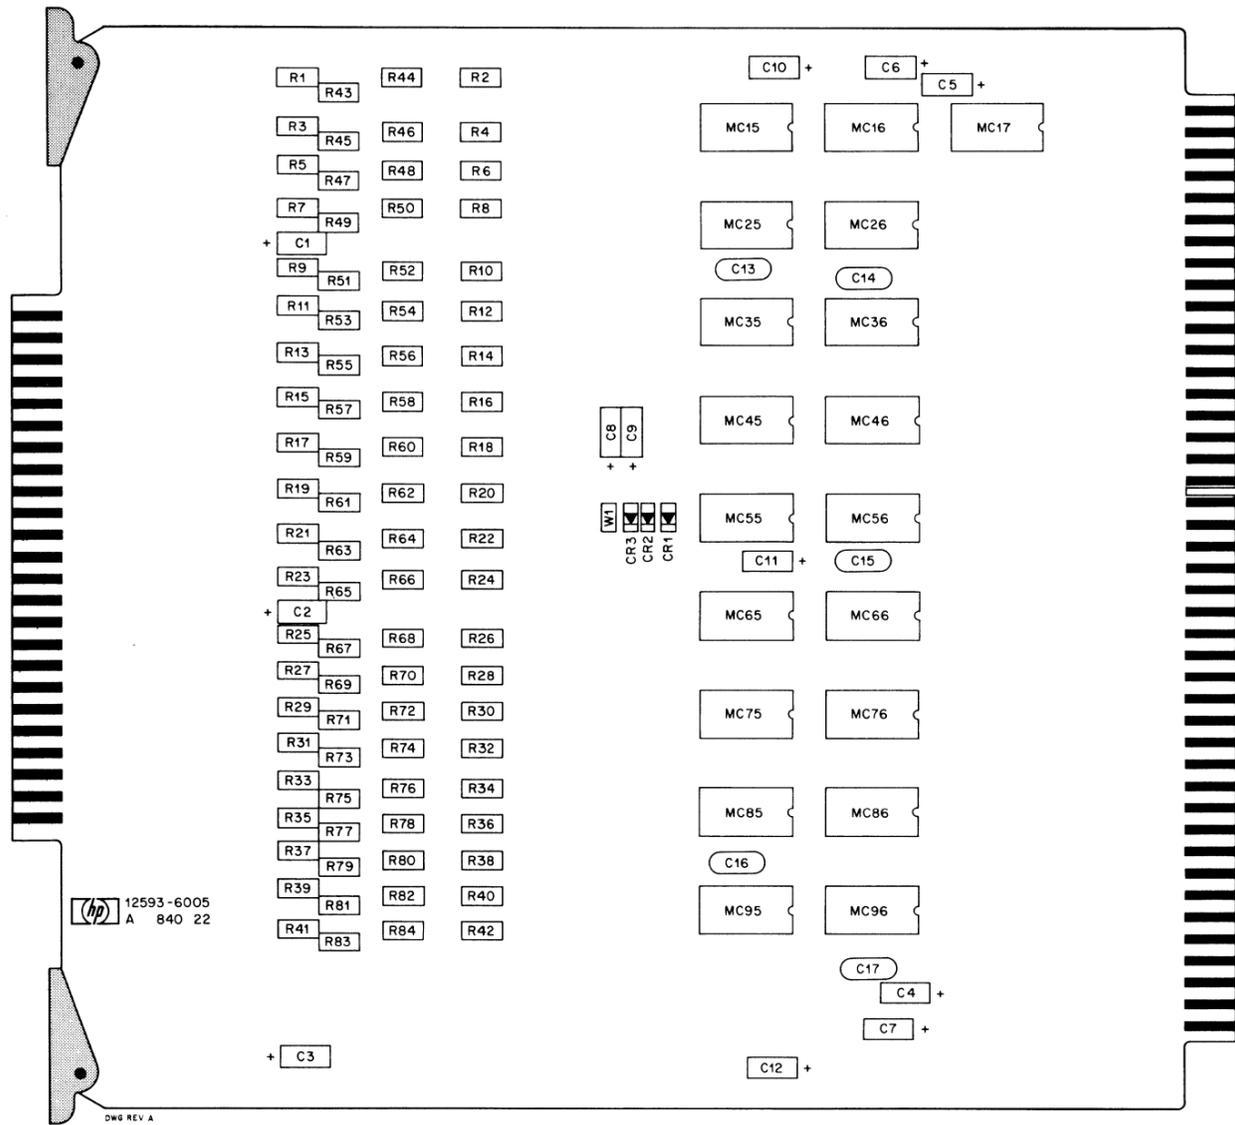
I/O-X2 Extender Card (12593-6005), Parts Location Diagram
